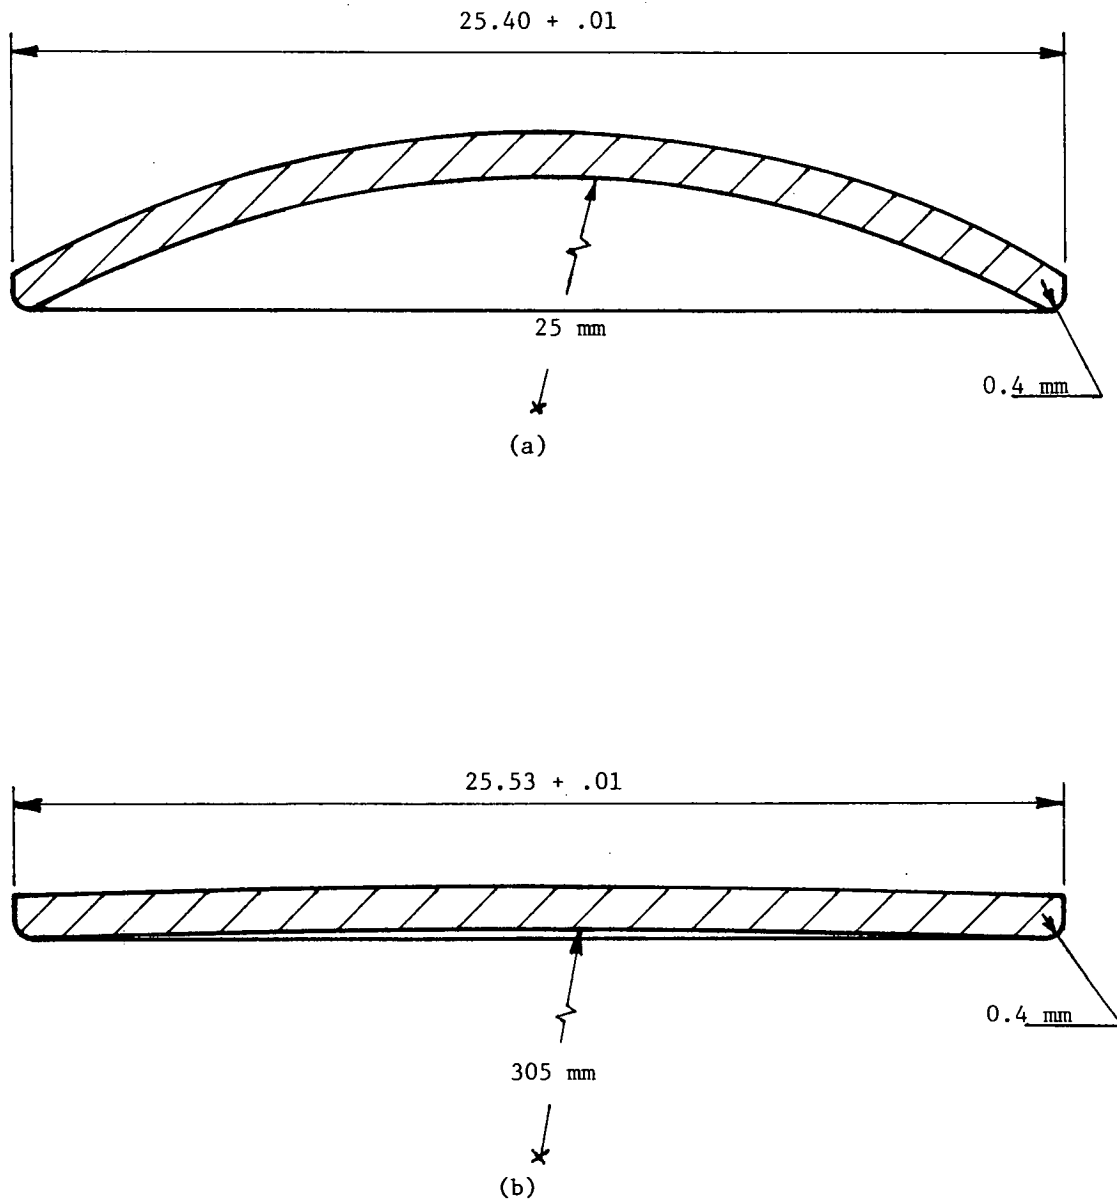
Polyethylene seals for the specimen mounting: (a) for a 2.5-mm air gap and (b) for the zero air gap and lower seal
